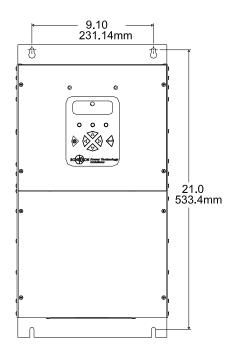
M3645 M11 Chassis Dimensional Outline
